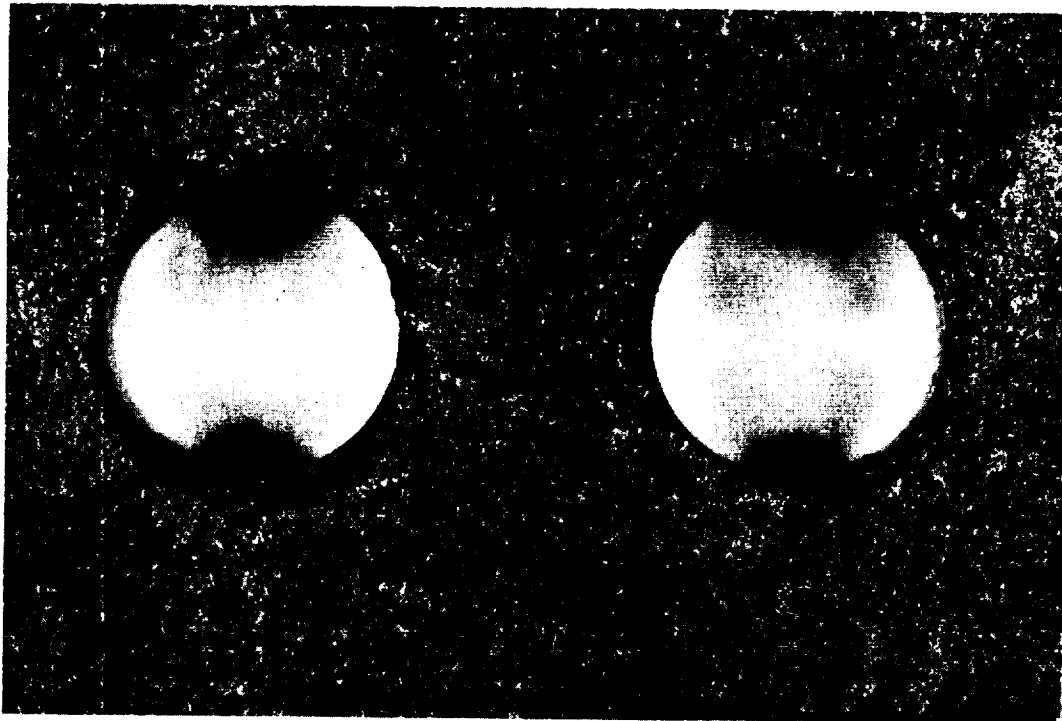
HOLE DRILLED WITH IMPROPERLY SHARPENED DRILL.
